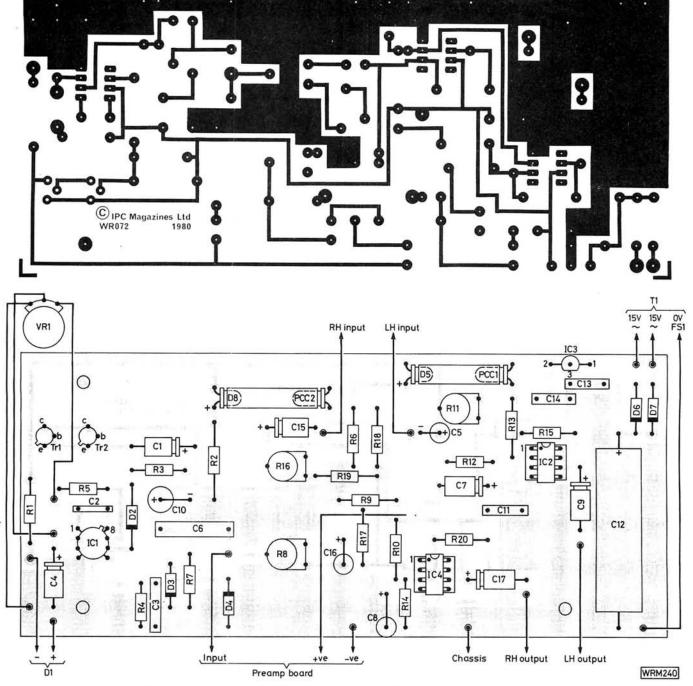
(Top) copper track pattern shown full size for the main p.c.b. Fig. 4: (Above) the component placement drawing for the main board
